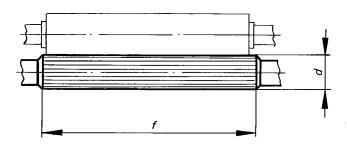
Bottom fluted roller for spinning preparatory machines
